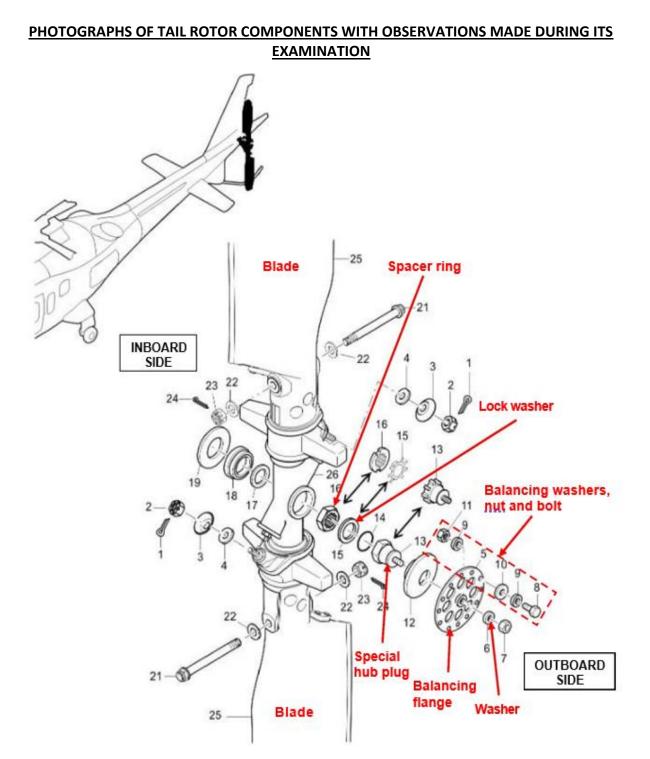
Exploded view drawing of the tail rotor installation, with indication of the relevant parts for the investigation.
